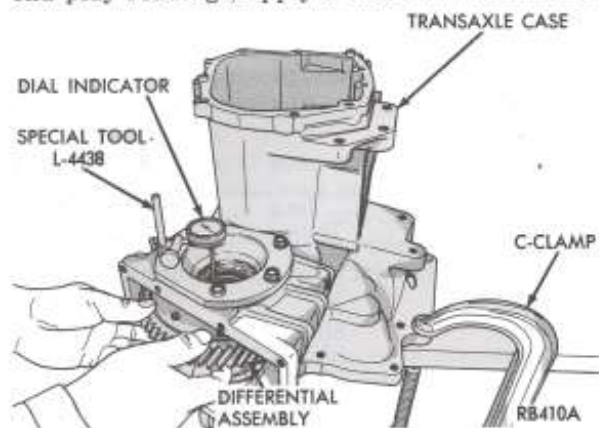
Checking Differential Bearing End Play to Determine Shim Thickness (A-525 only)
